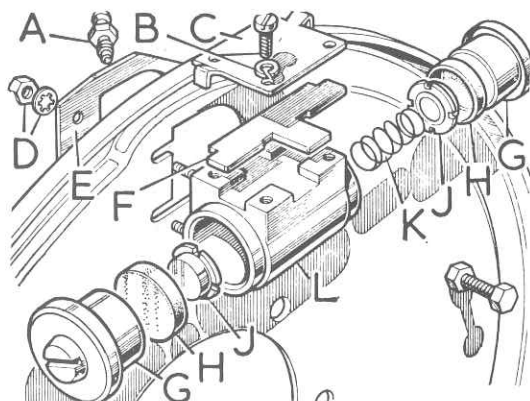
Wheel cylinder assembly fitted to the rear brakes of LWB models
